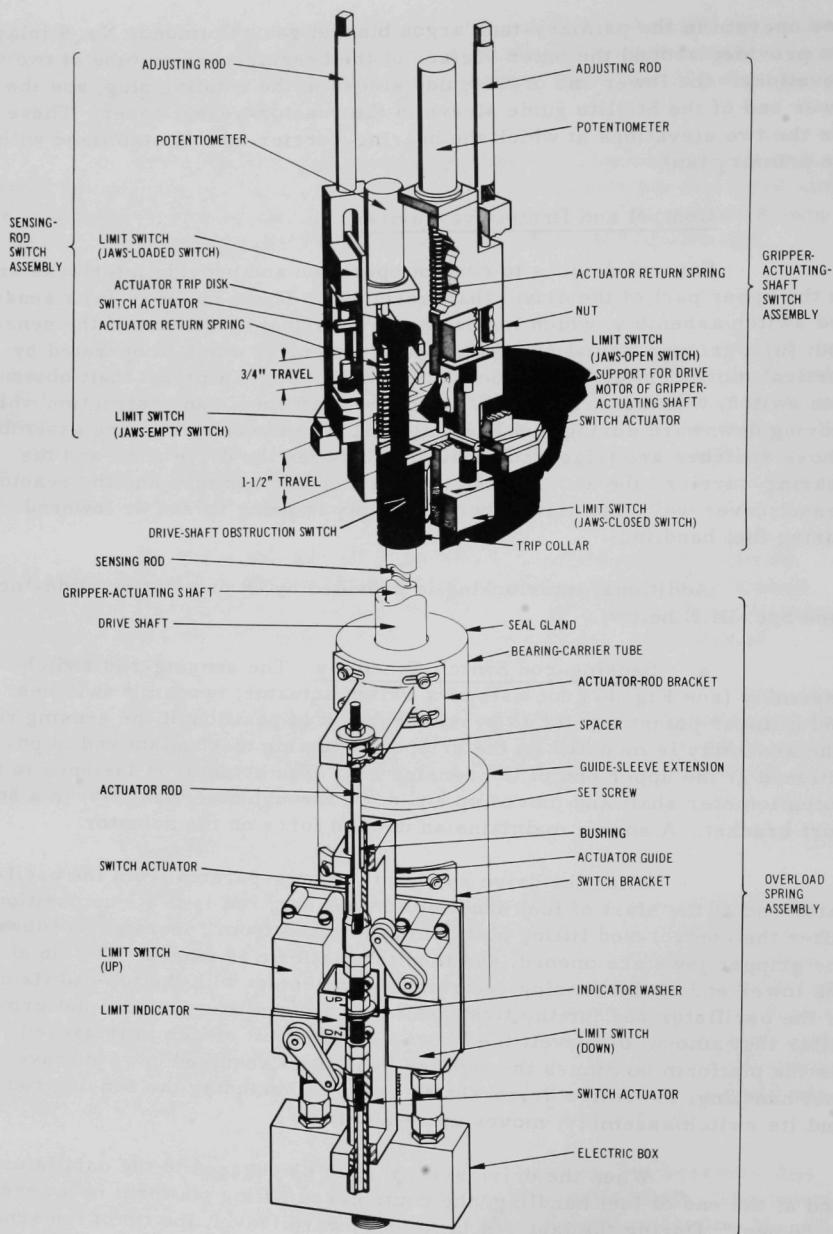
Control and Protective Devices on Drive-shaft Assembly
